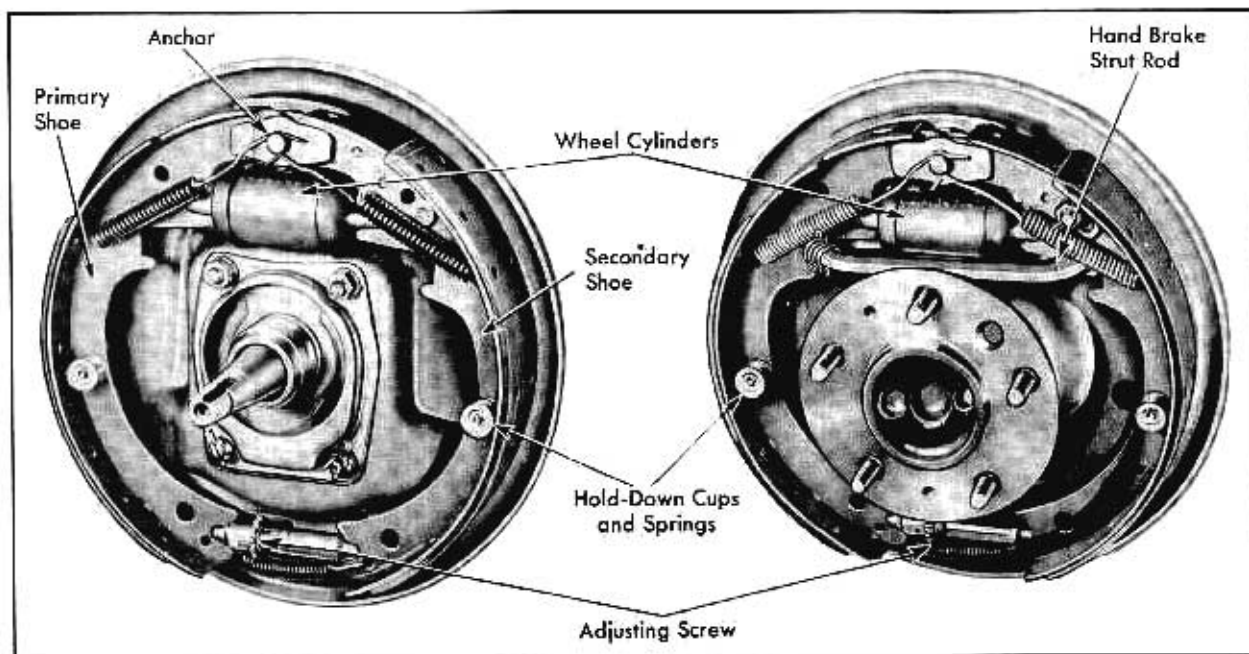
Brake Mechanism at Front and Rear Wheels
